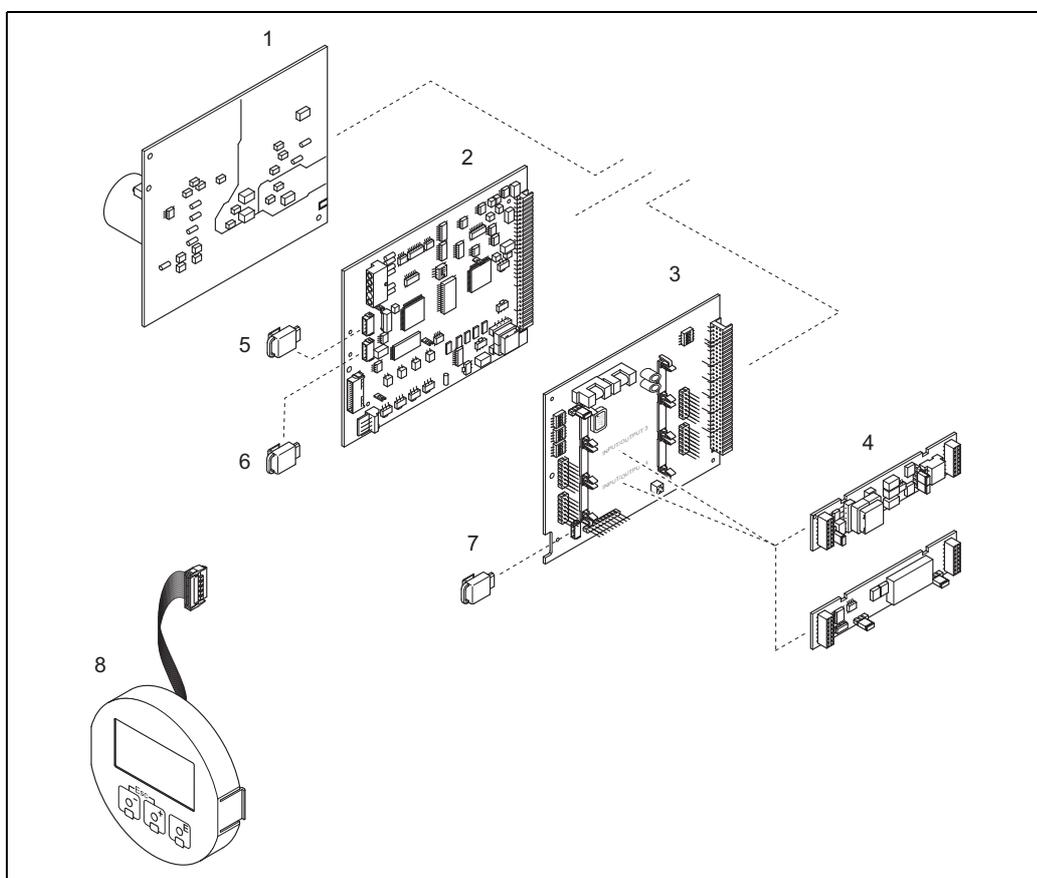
Spare parts for transmitter (field and wall-mount housings)
